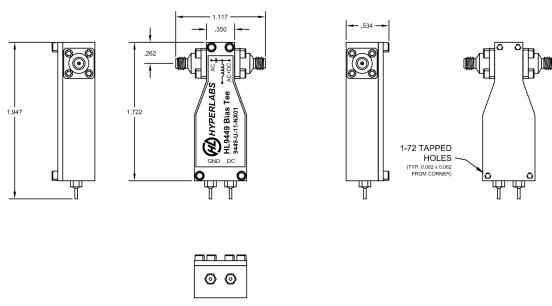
HL9449 with DC bias pins Mechanical Drawing
